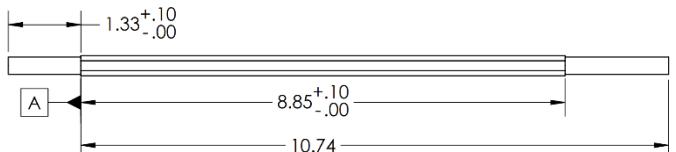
Drive roller rod manufacturing drawing, rendered in SolidWorks, with dimensions in inches.
